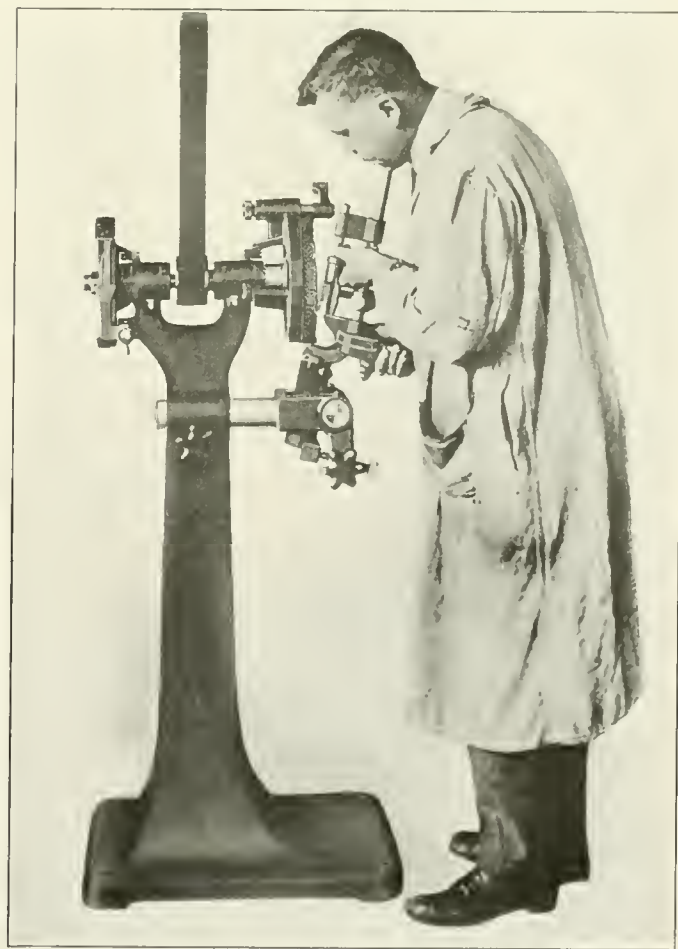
No. 2 Grand Rapids Tap Grinding Machine
